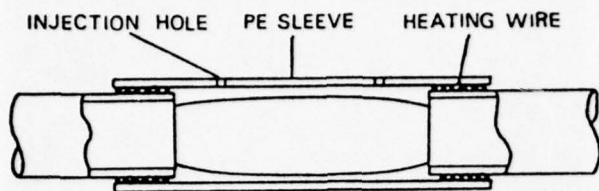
Splice enclosure for the PE-P submarine cable, which uses a welding technique using an electrical heating wire for sleeve-cable jointing.
